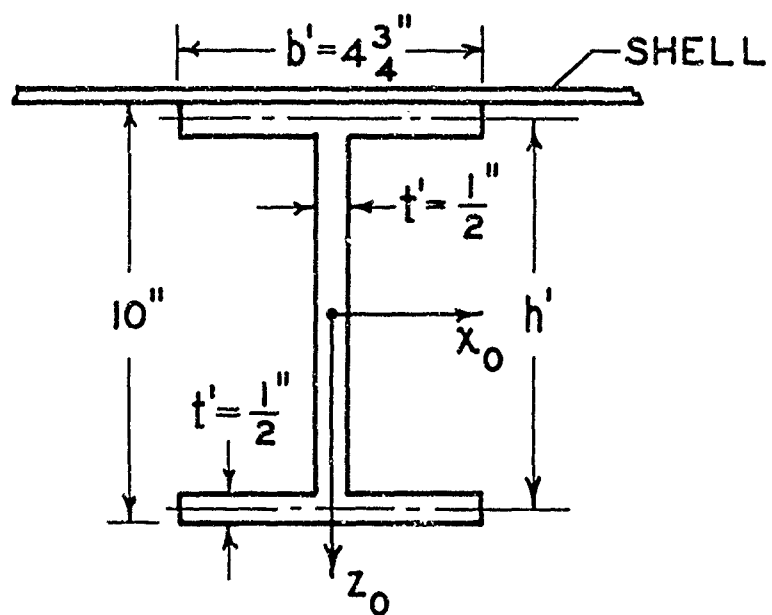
DIMENSIONS OF RING SECTION AND SHELL
